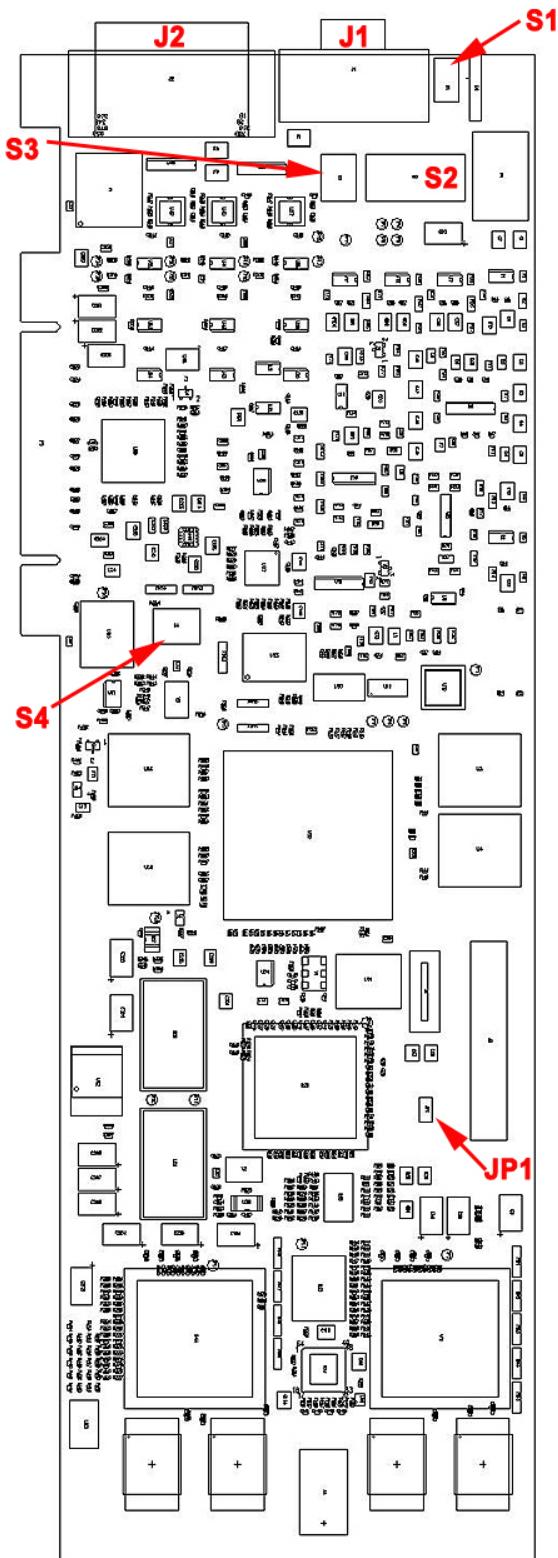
Model 7007/7008 PCI Tracker Board Top Assembly
